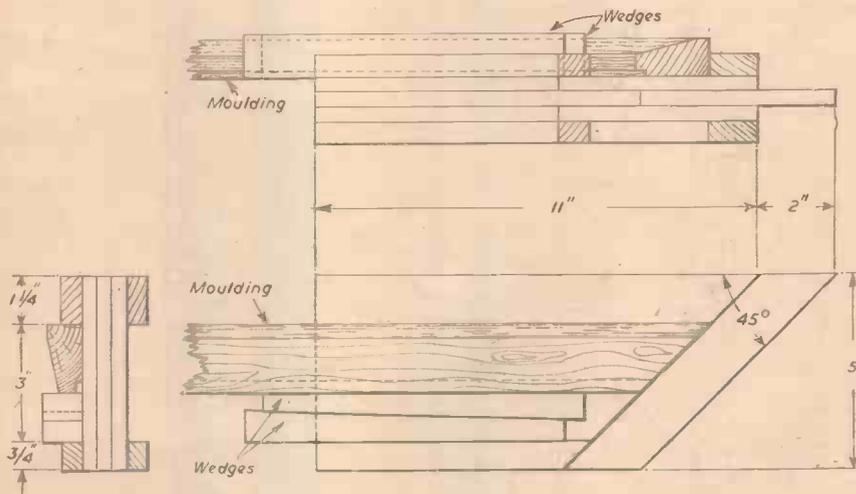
Details of a shooting-board for dressing the ends of the moulding.
